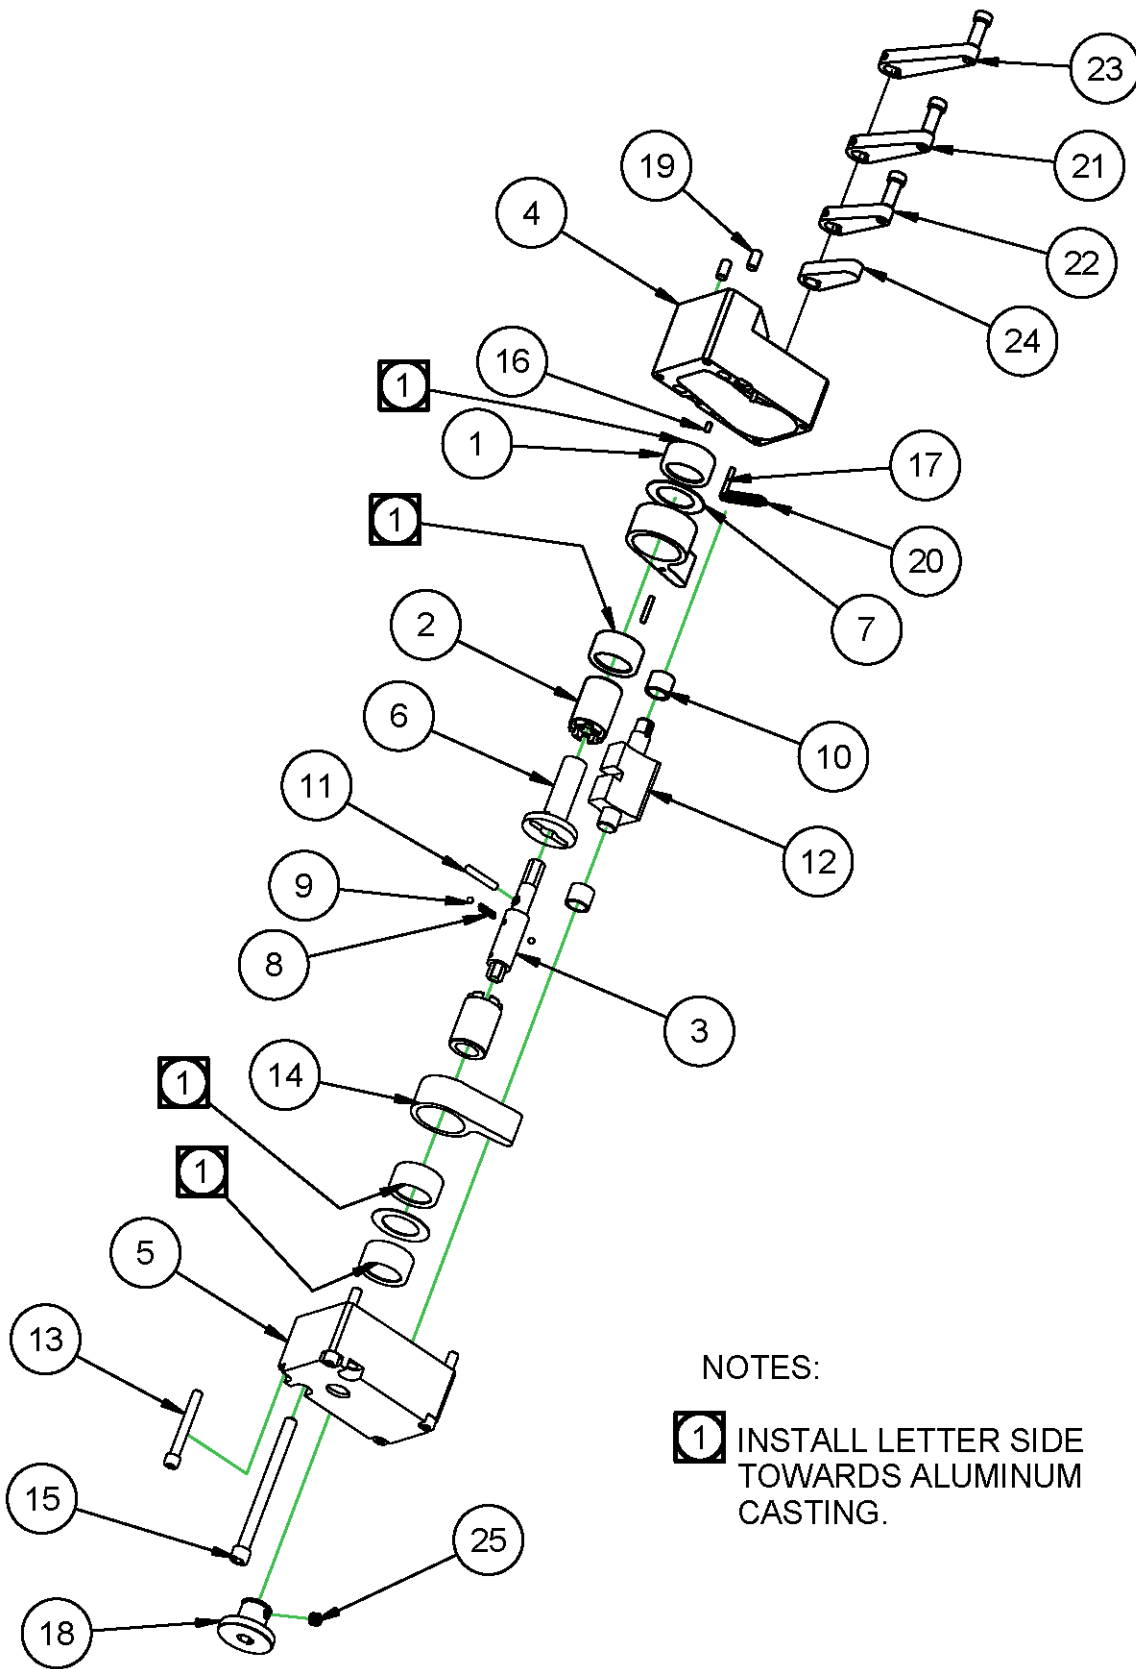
FEED BOX ASSEMBLY (P/N 47419)
